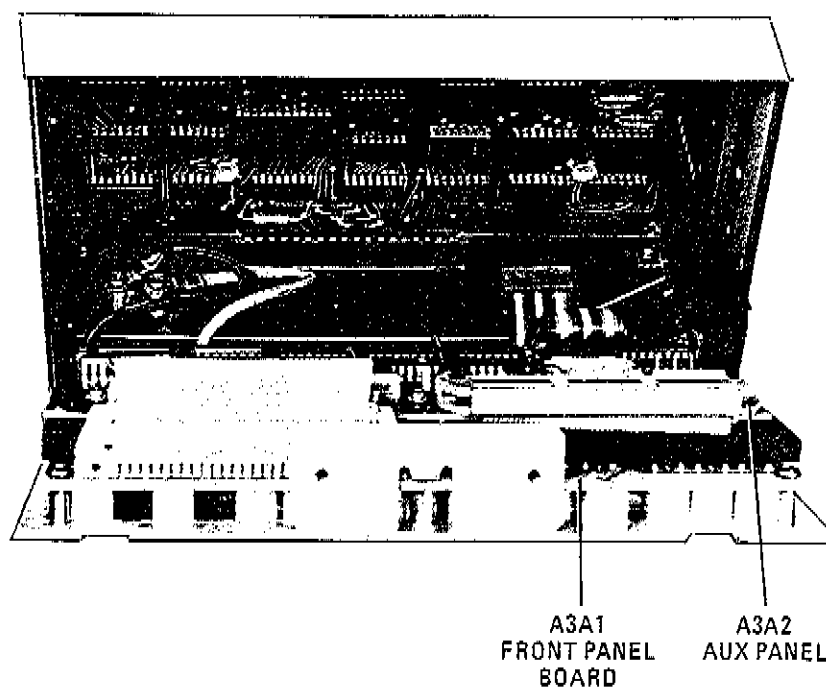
A3A1 and A3A2 Showing Front Panel Folded Out
